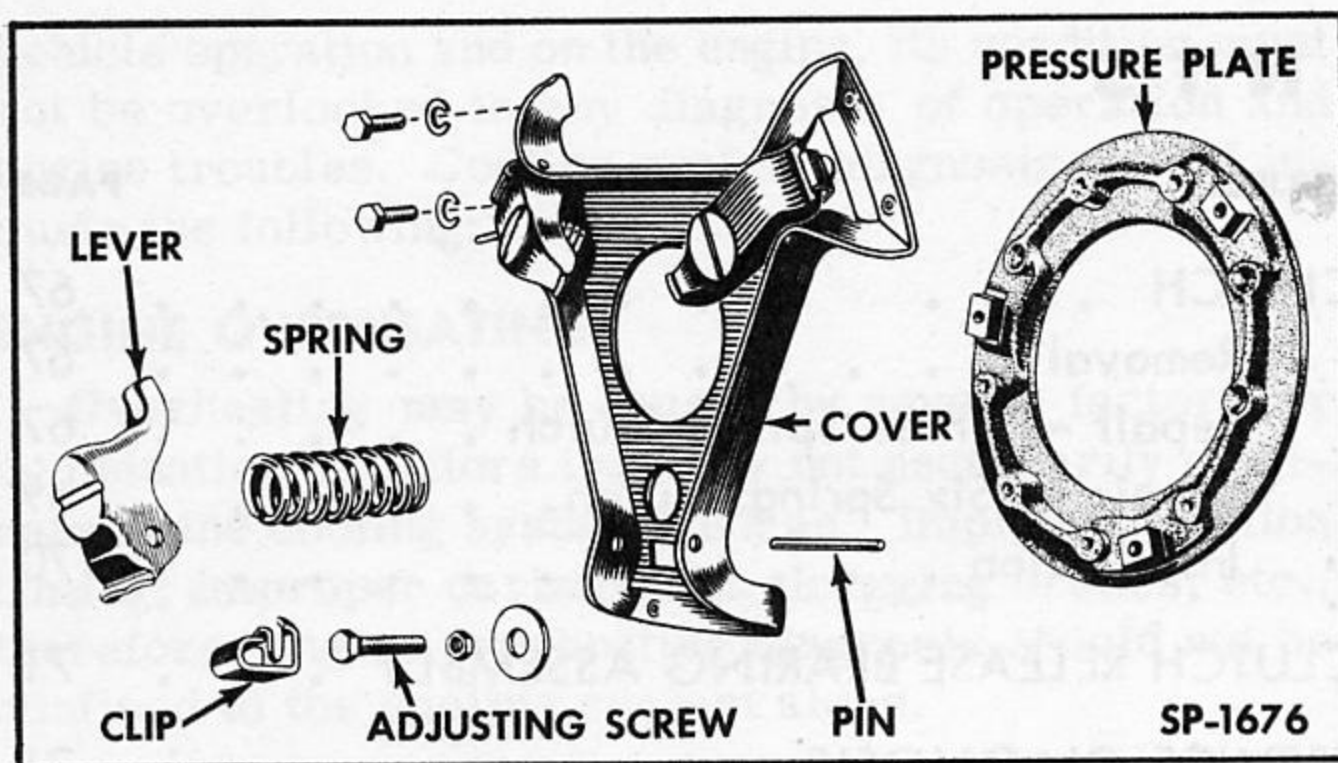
Three Spring Clutch Pressure Plate Assembly—Exploded View
